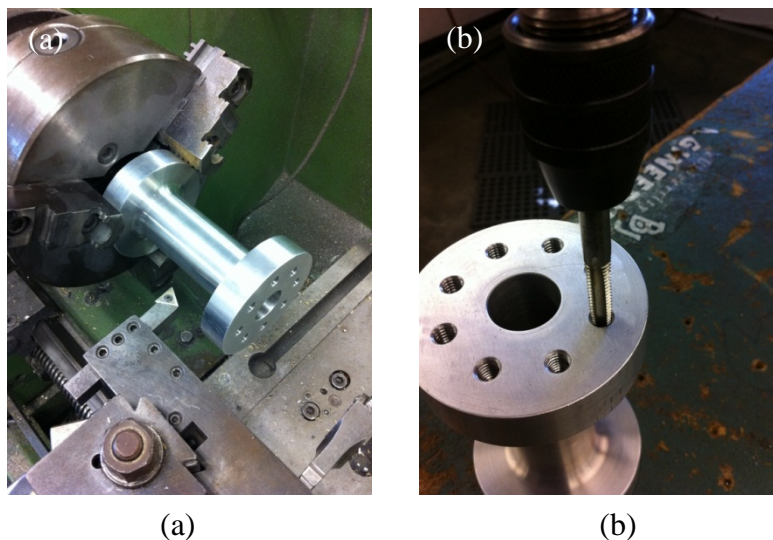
(a) Load Cell in Lathe (b) Load cell being tapped for mounting to MTS system
